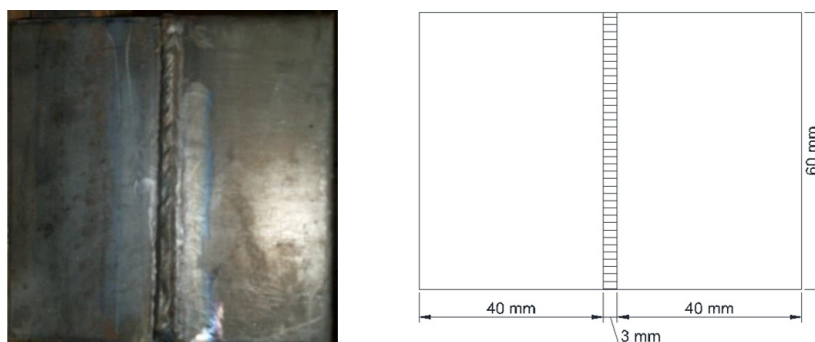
Welded Plate and the geometry of the 10 mm plates butt welded with a weld gap of 3 mm
